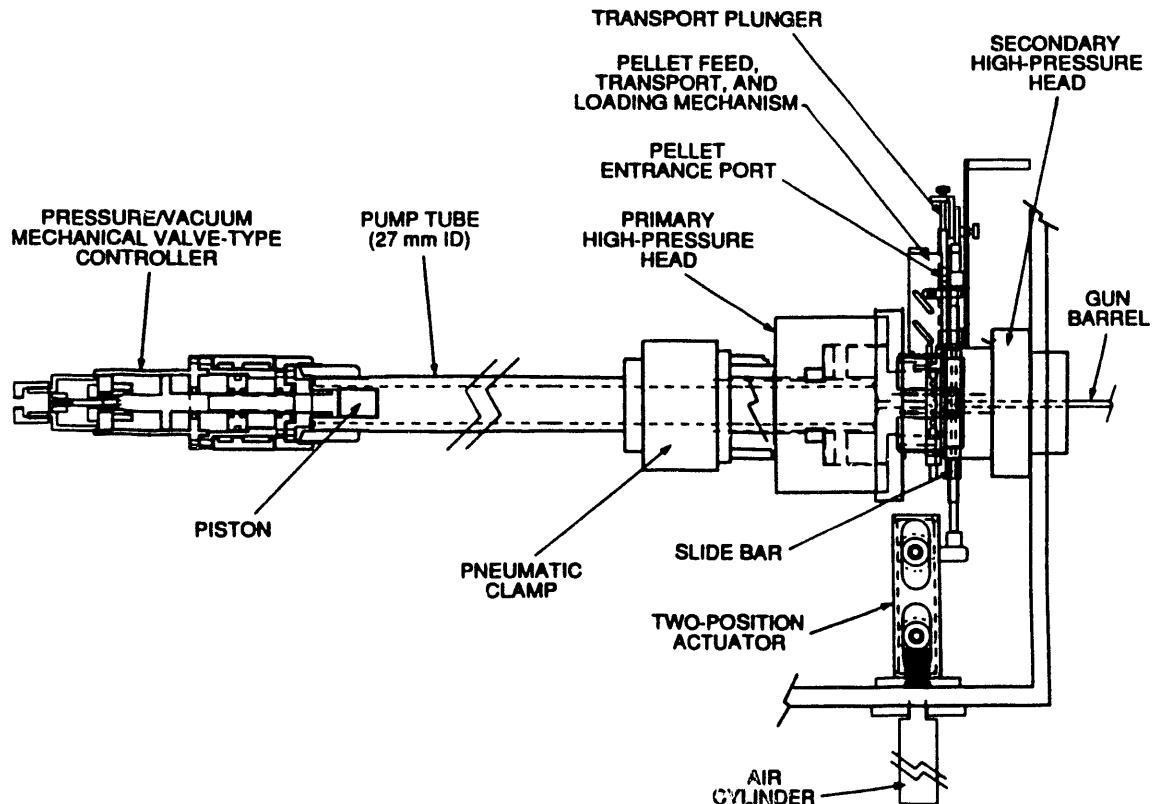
Assembly drawing of ORNL repetitive two-stage light gas gun.
